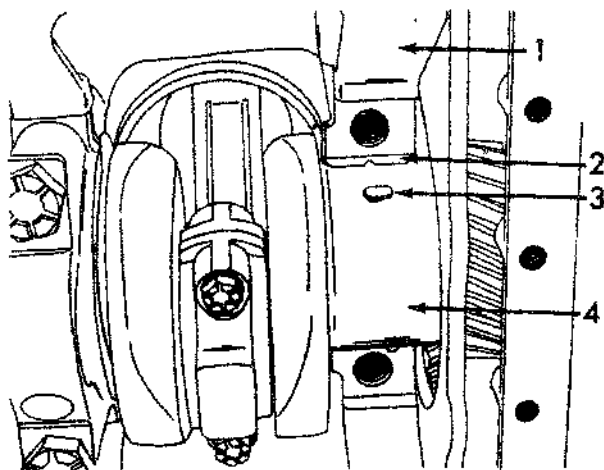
Removing Front Main Bearing Upper Shell (T-51678)
